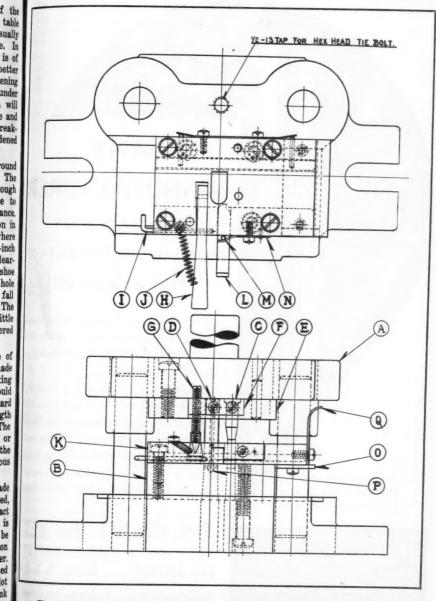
Drawing of piercing and blanking die for producing the part shown in Fig. 6.
